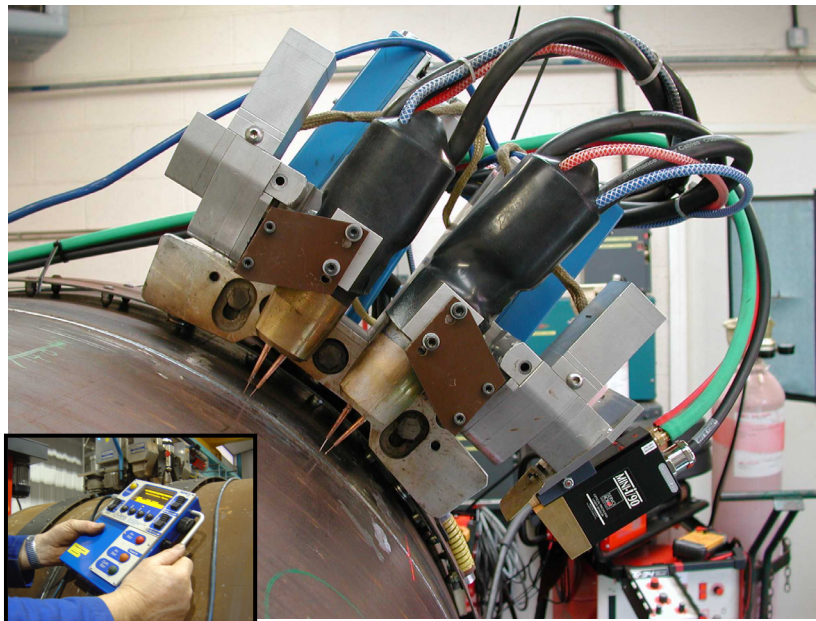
Dual tandem welding head and pipe band with pendant control
